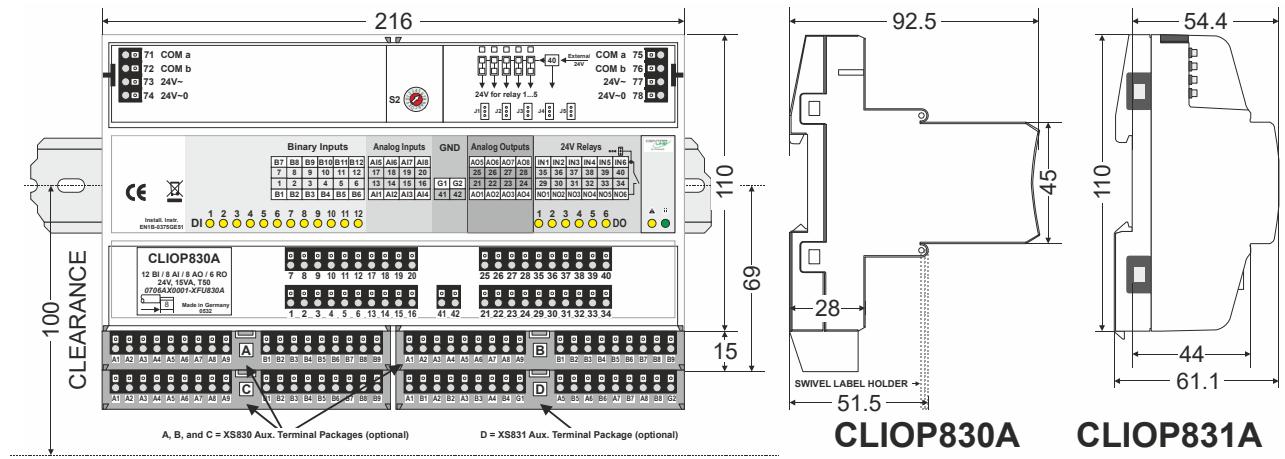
Mixed I/O Modules CLIOPI830A (shown with four auxiliary terminal packages) and CLIOPI831A (shown without auxiliary terminal packages – which can be mounted on the bus side, only), dimensions (in mm)
